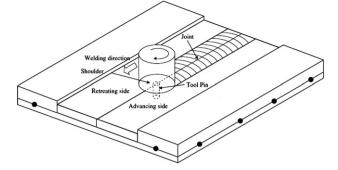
Schematic view of specimens in fixture during welding process.
